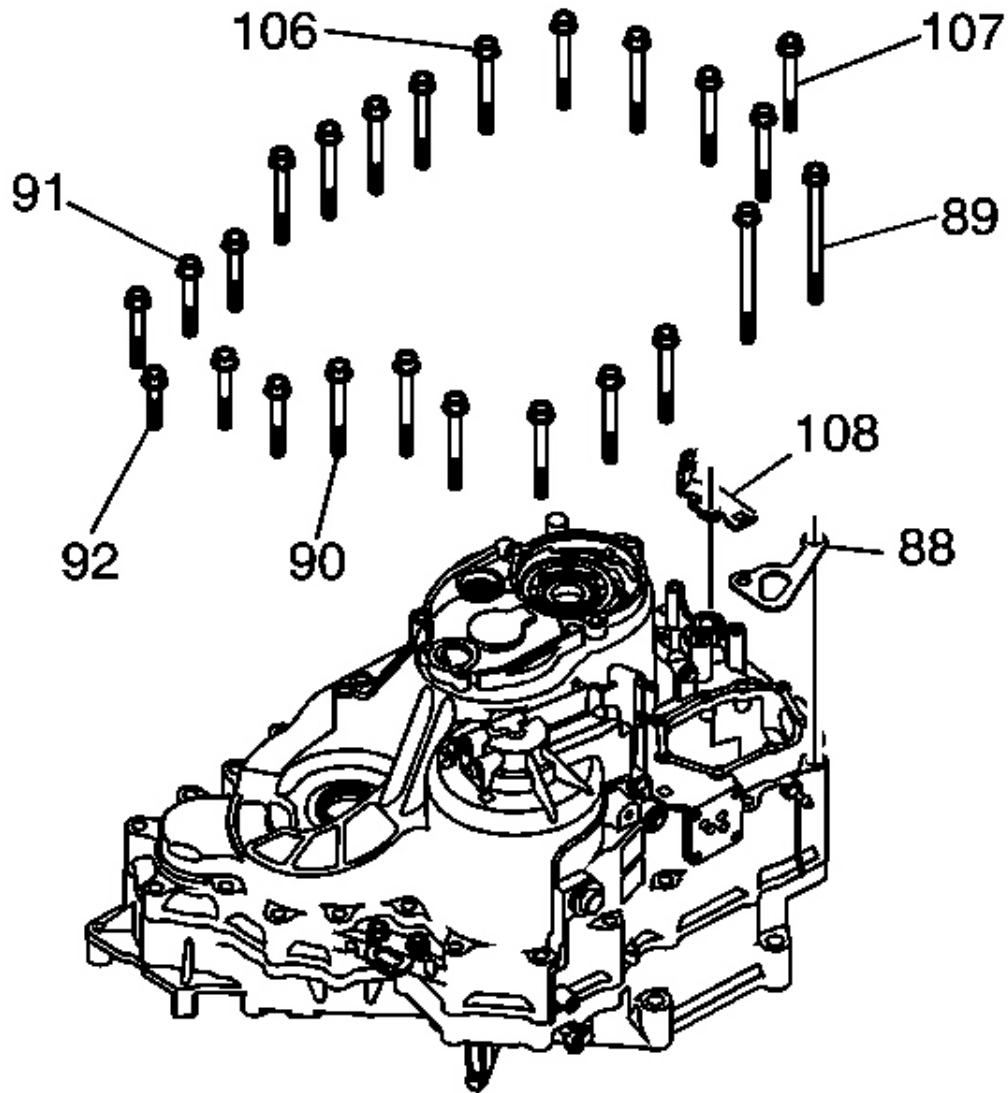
Torque Converter Housing Bolts, Transmission Lift Bracket & Wiring Harness Bracket
